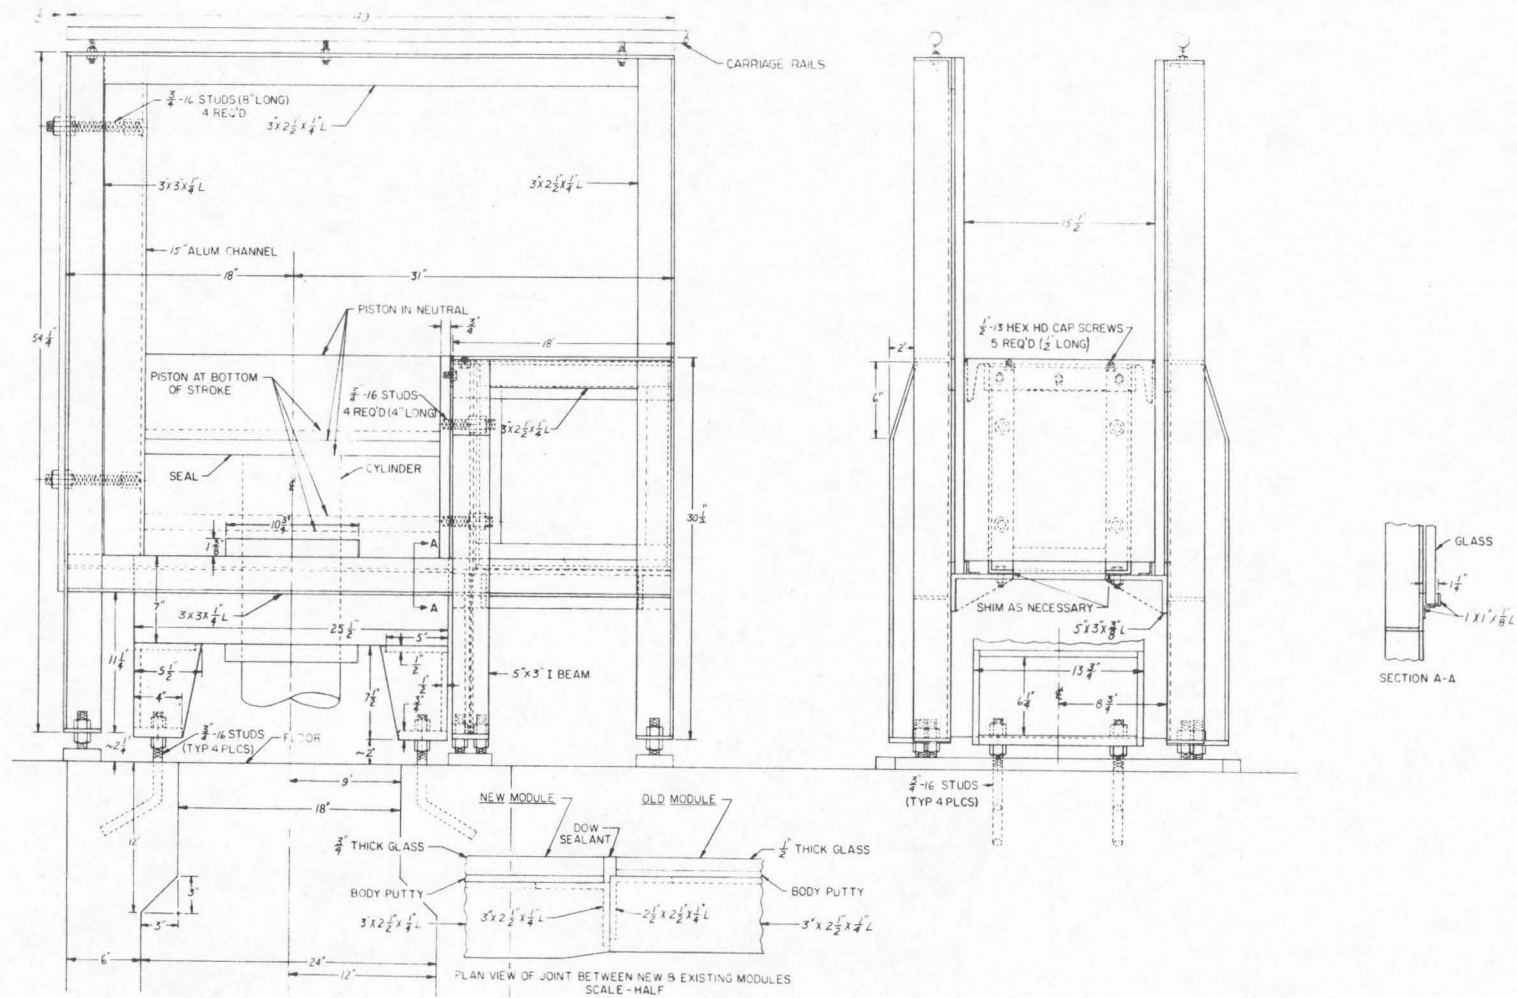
Schematic drawing of tank module with the wave generator installed.
